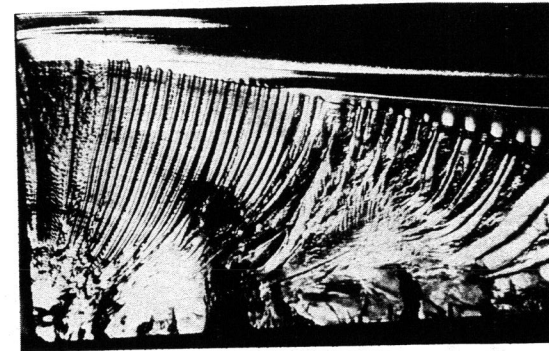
A fantastic resemblance of a typically hand made "Fan shape" structure formed during fatigue crack progression in a cast perspex while performing fatigue testing under 200 psi load condition. X 6
